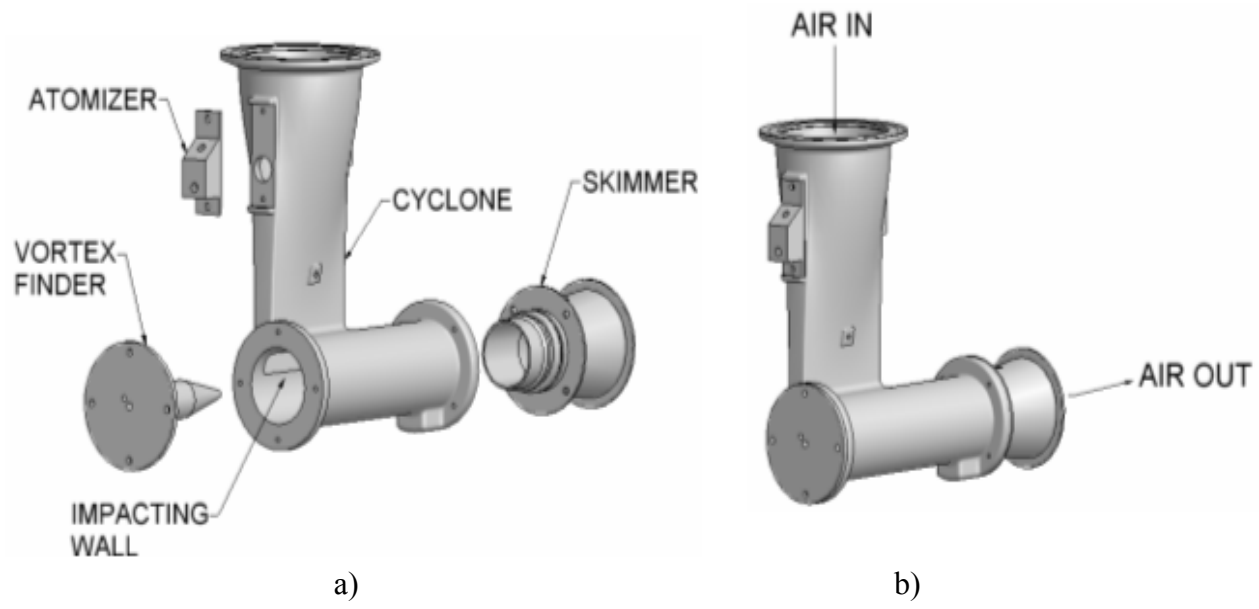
1250 L/min cyclone. a) components, b) assembly.
